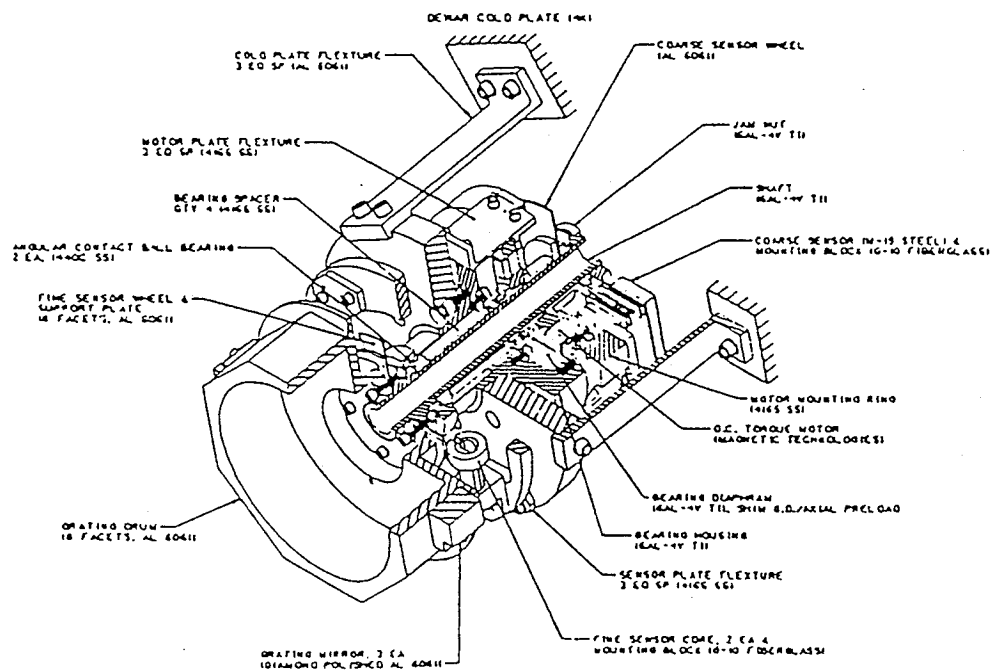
shows the overall design of the SIRTf system and the key elements. Figure 2 shows an isometric cutaway view of the infrared spectrograph grating drive mechanism. The unit is a simple drive mechanism that consists of a hollow rotating shaft that is simply supported by a single pair of angular-contact ball bearings. An 8-faceted grating drum is used to mount test mirrors to the near end of the shaft. The mirrors were later used to verify the angular motion of shaft and drum. The bearings are mounted into the stationary housing and preloaded axially by means of a diaphragm. The physical envelope of the unit is approximately 5 in. dia \times 6 in. length.
